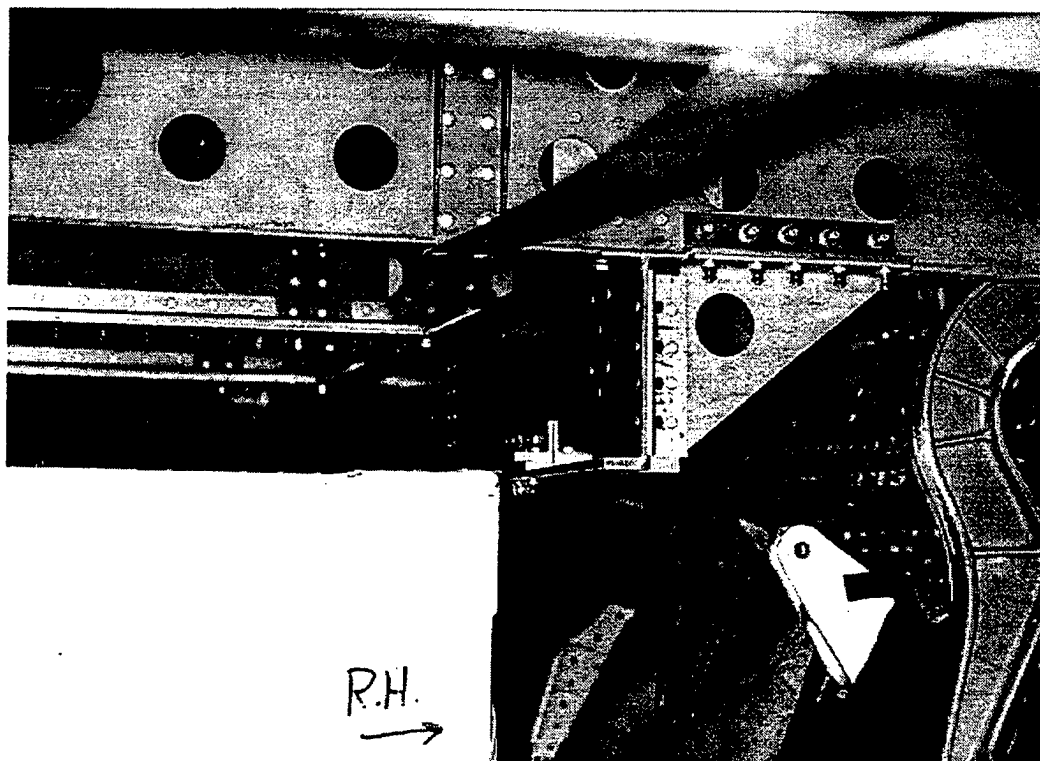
PRETEST AUXILIARY FUEL TANK RIGHT ATTACHMENT FRAMEWORK
